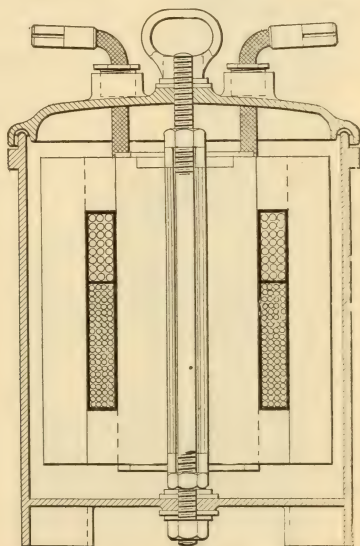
SECTION OF SHELL TYPE TRANSFORMER.
